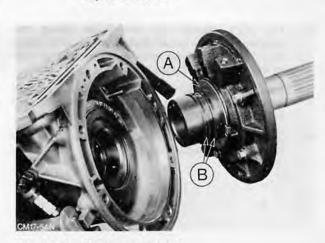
A – Thrust washer No. 1 B – Piston rings
